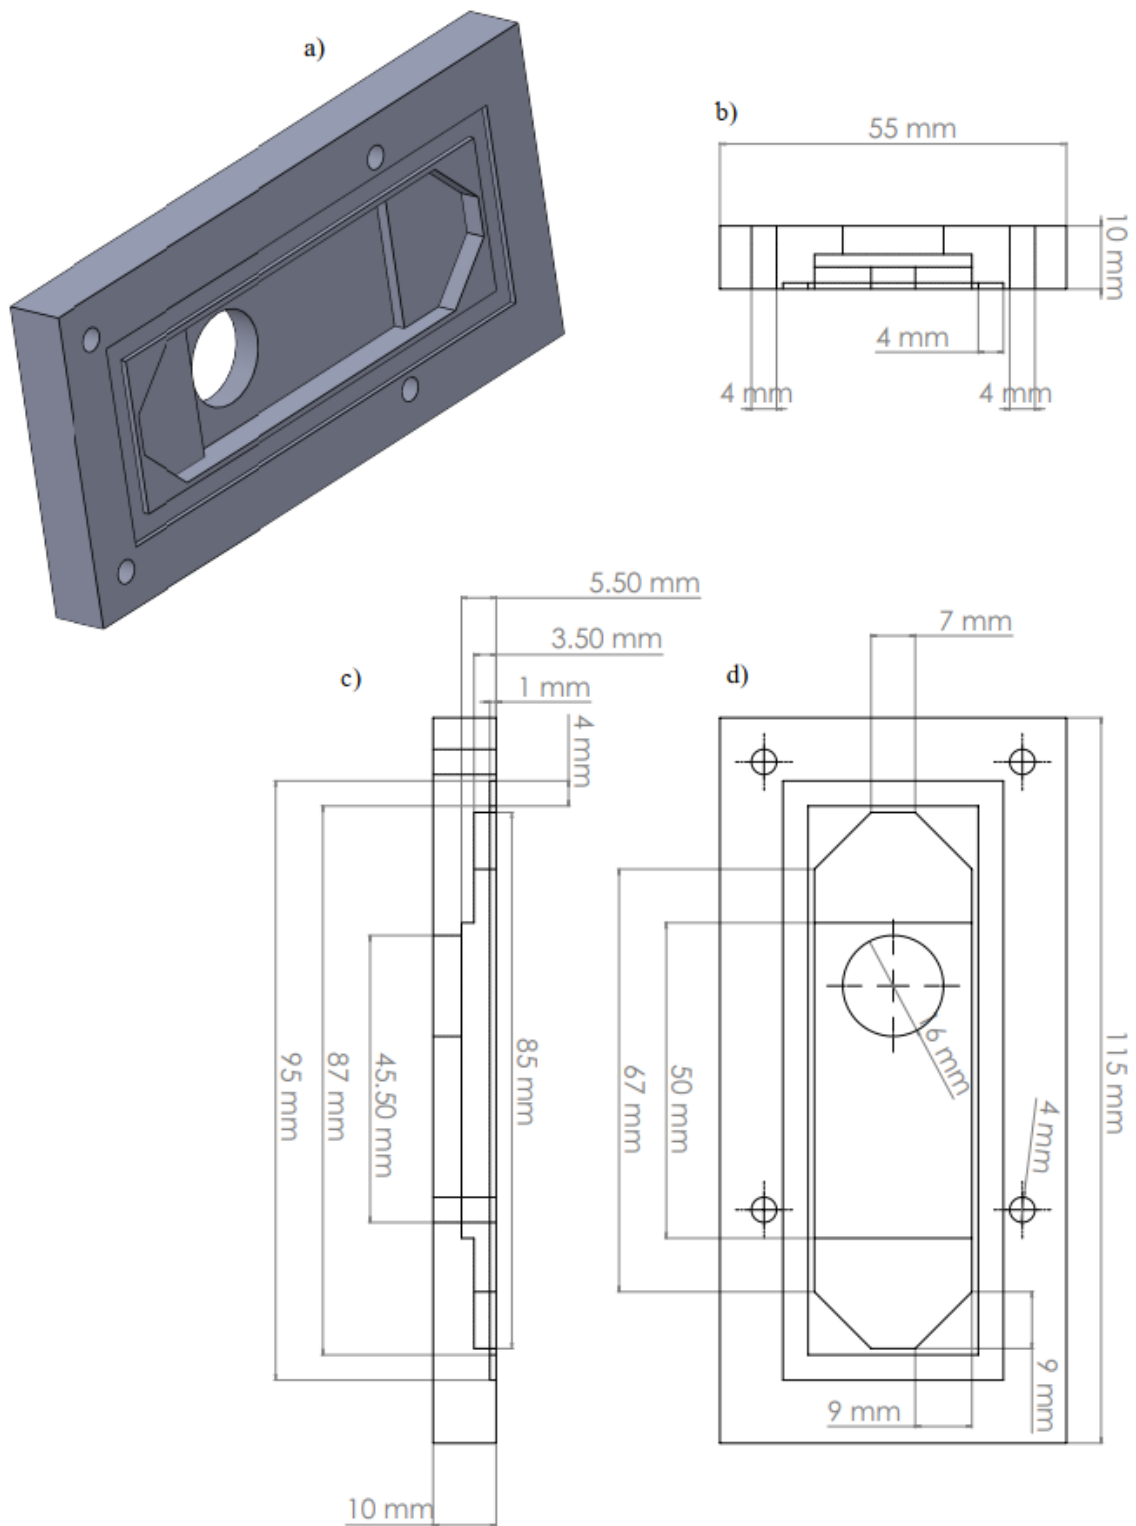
3D design of sample holder with the size of 5 cm x 2.5 cm a) 3D view, b) Front view, c) Left view, d) Top view.
